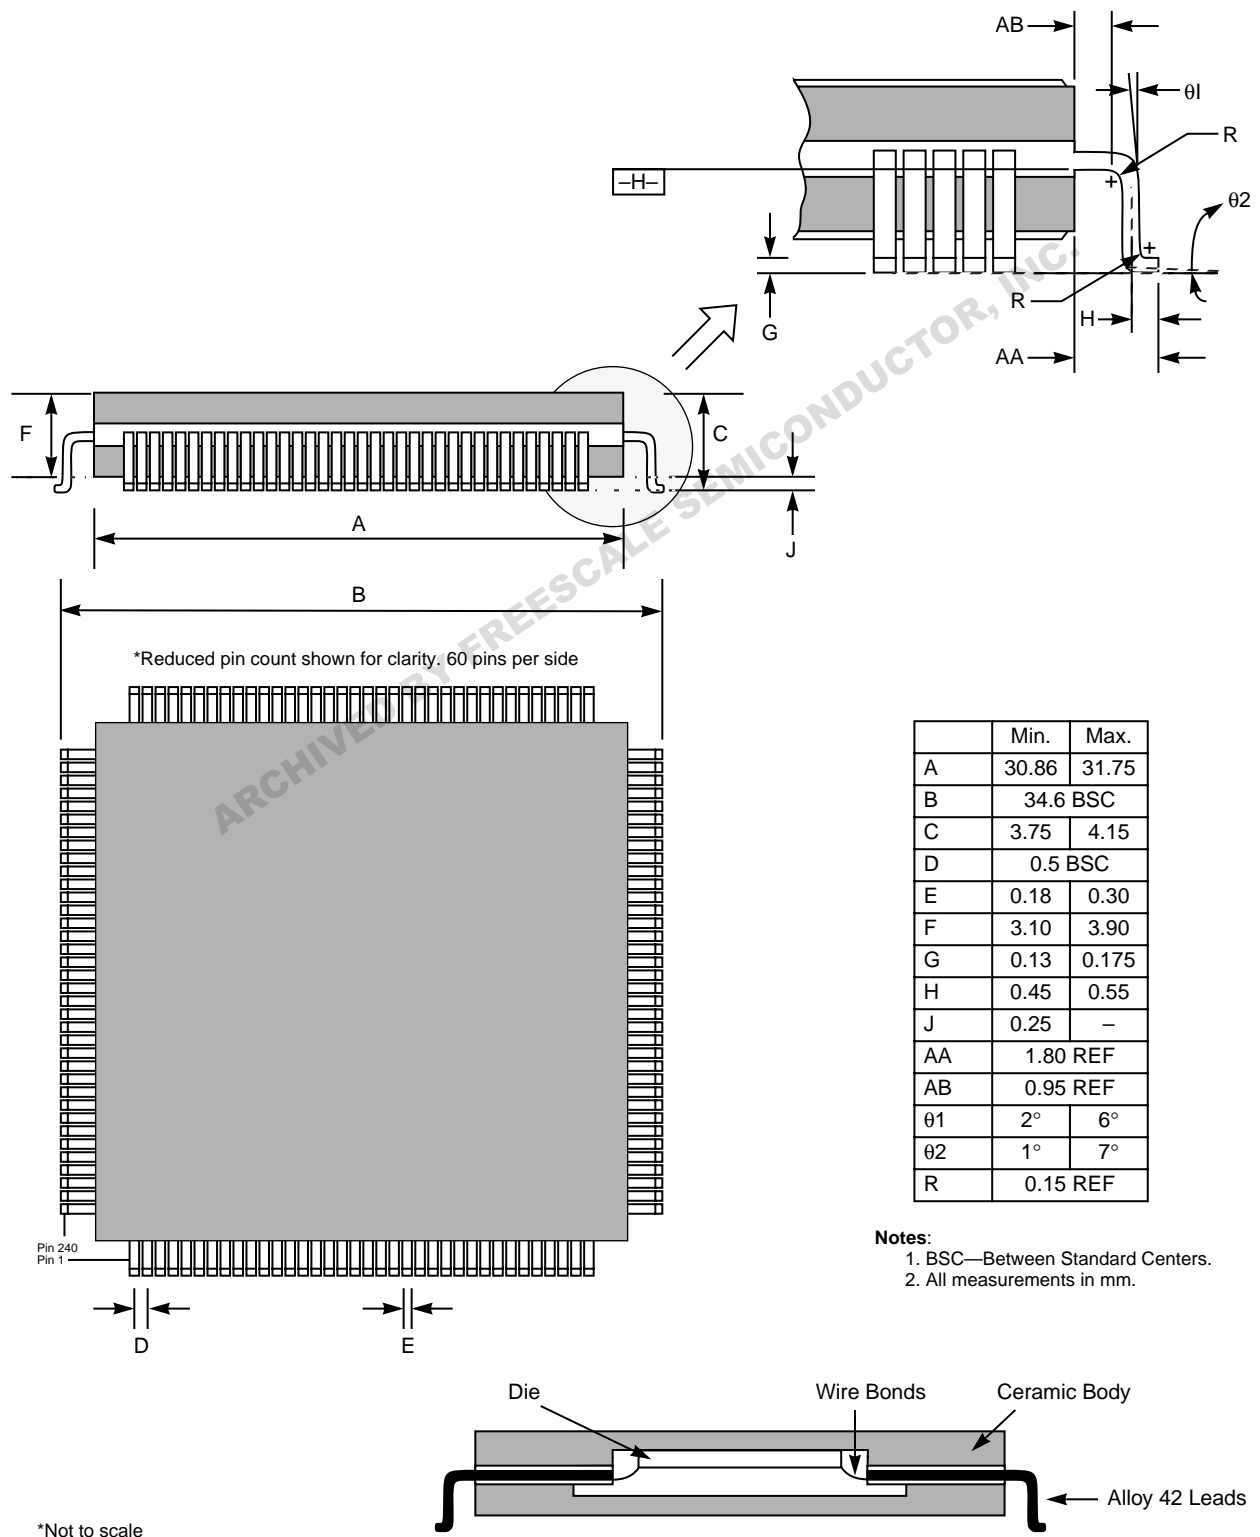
Mechanical Dimensions of the Motorola Wire-Bond CQFP Package
